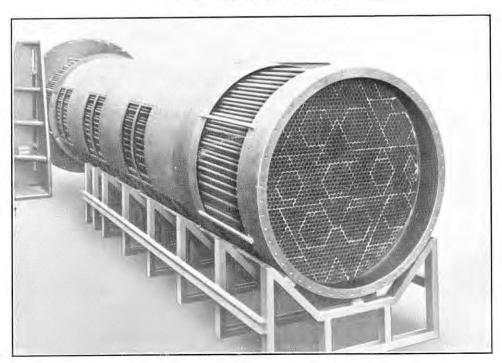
Heat-Exchanger Inner Frame Tubed and Sheeted.
